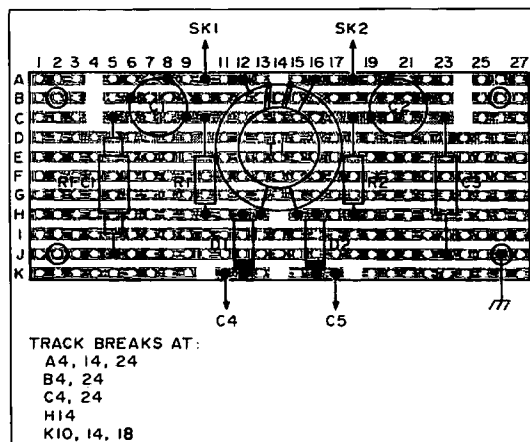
Component locations on the Veroboard. Drill the mounting holes very carefully to avoid damaging the board.
